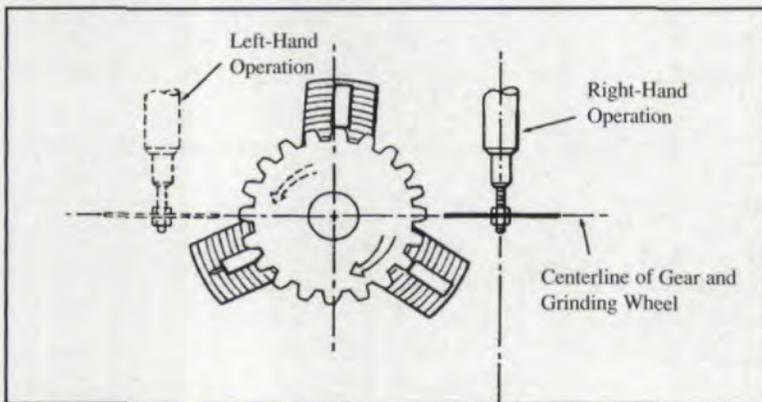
Aligning the grinding wheel to the center of the gear.
